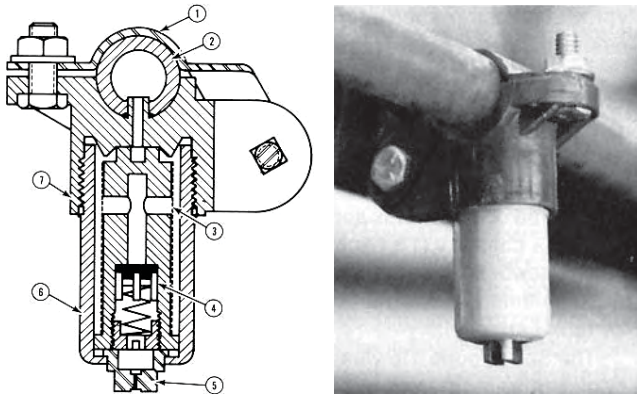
Cross Section of Nozzle Assembly: (1) Clamp Top, (2) Spray Boom, (3) Strainer, (4) Check Valve, (5) Nozzle Tip, (6) Nozzle Cap, (7) Nozzle Body.
